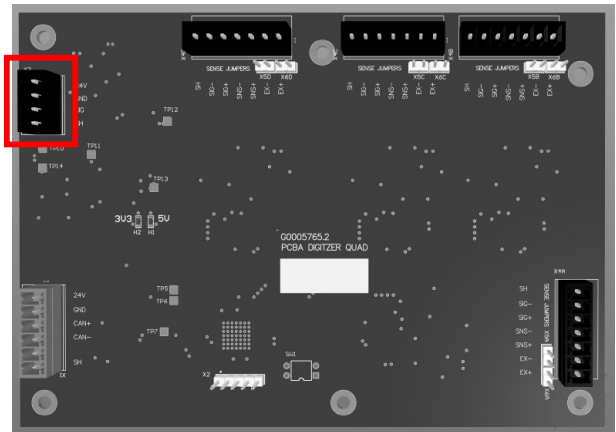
Ramsey Flex Quad Digitizer PCB Speed Sensor Connection
